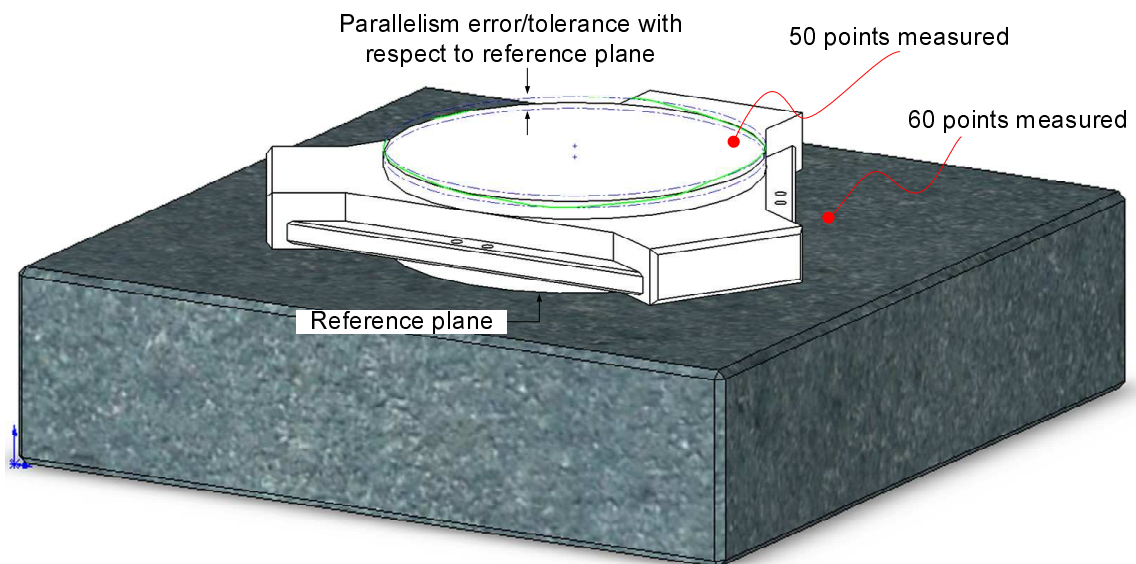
Parallelism measurement between the two fly cut surfaces
